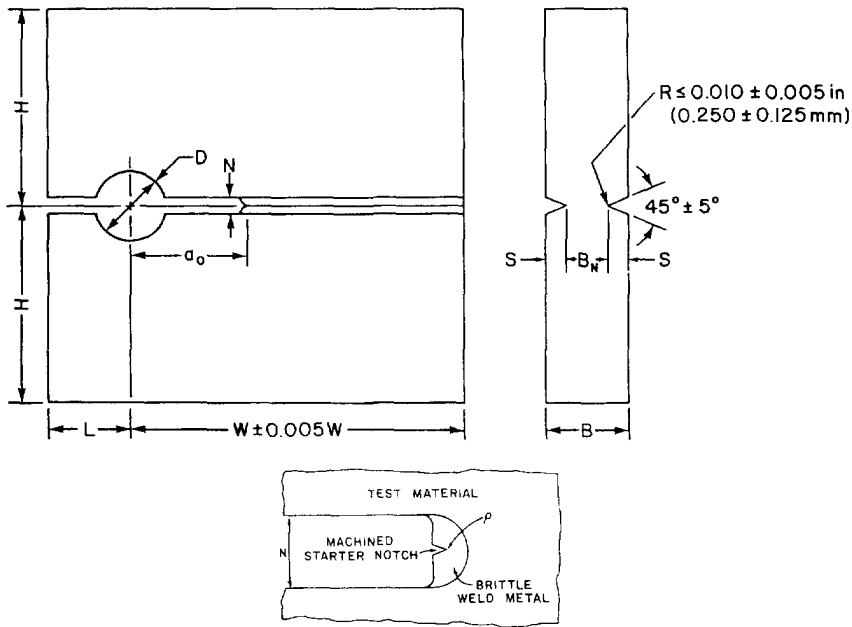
Geometry and dimensions of a crack-line wedge-loaded compact crack arrest specimen [from ASTM E1221 (1993)]. Copyright ASTM. Reprinted with permission.
